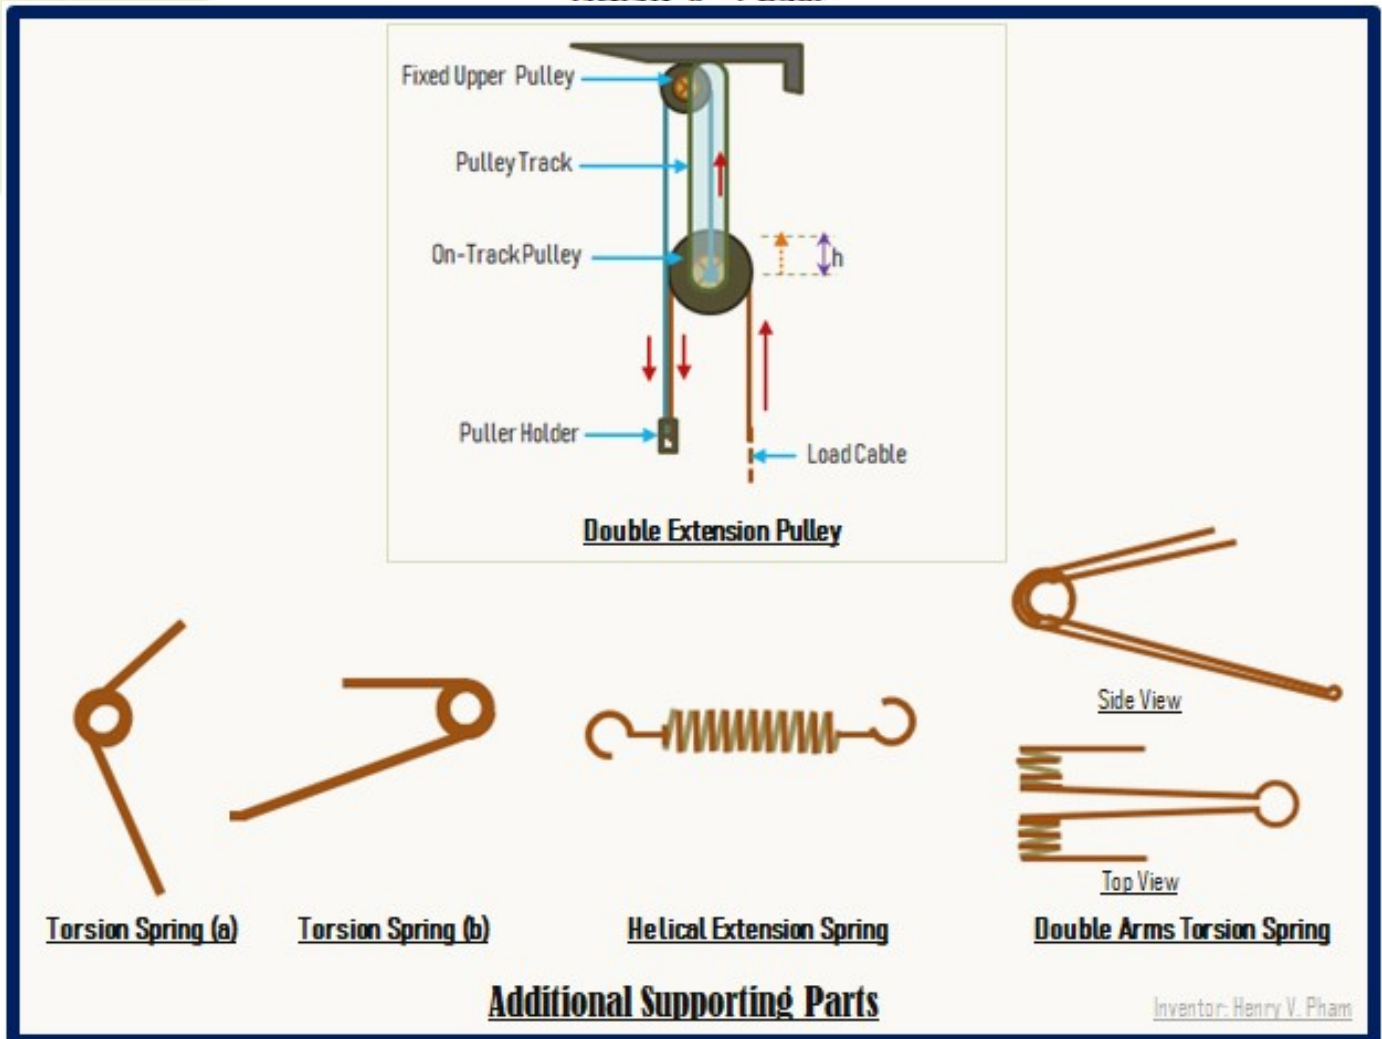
360° Stand G-Rotator Fan - Additional Supporting Parts
